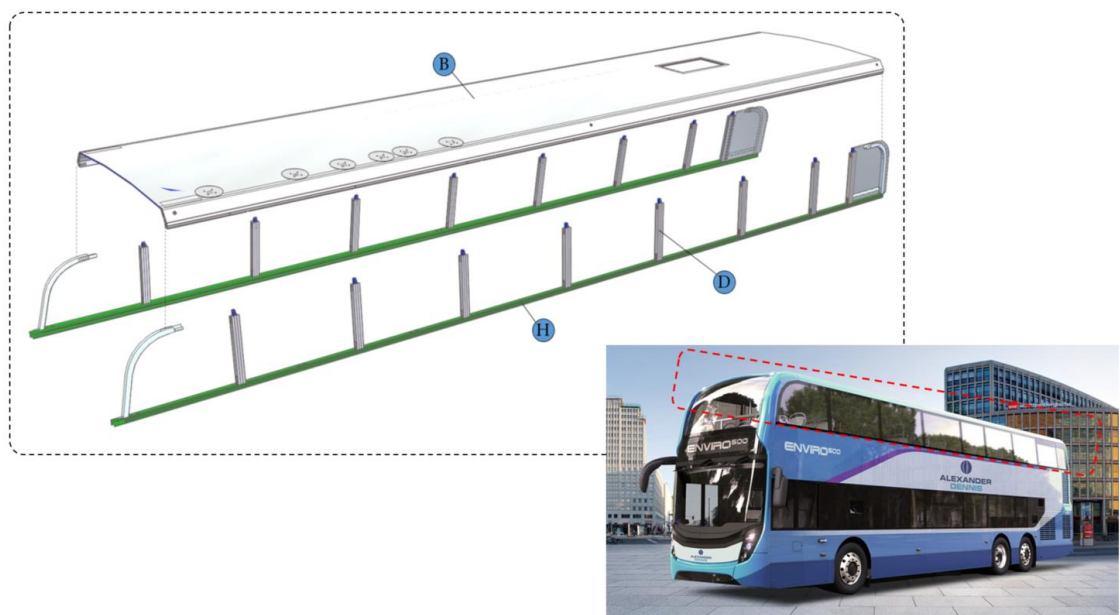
An exploded view of the main structural elements of the upper-deck structure. Vertical pillars (D) are joined to the waist-rail beam (H). The roof panel (B) is then mechanically joined to the vertical pillars.
